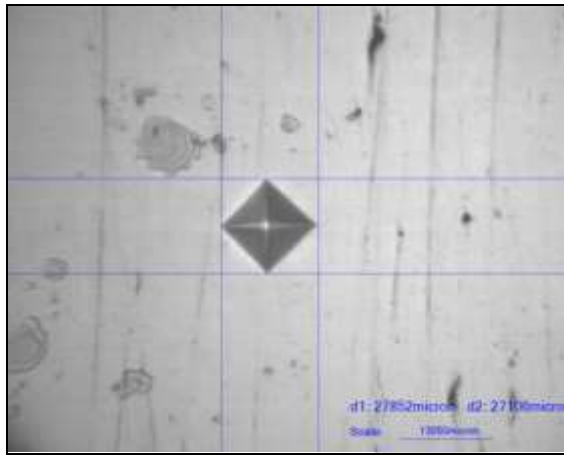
Indentation of Micro hardness Testing for TIG Weld Joints
